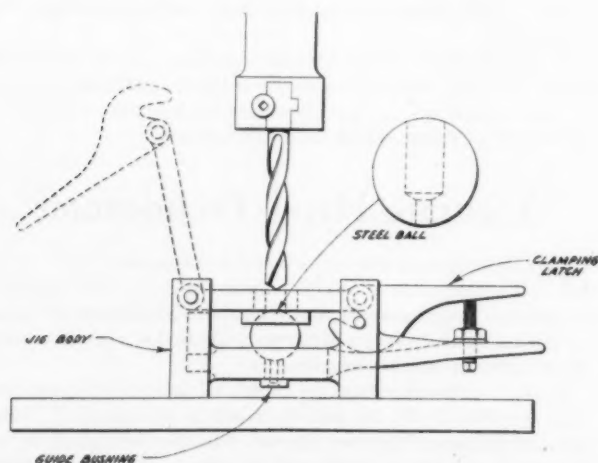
SIDE VIEW OF DRILL JIG USED IN DRILLING HOLES IN SMALL STEEL BALLS
